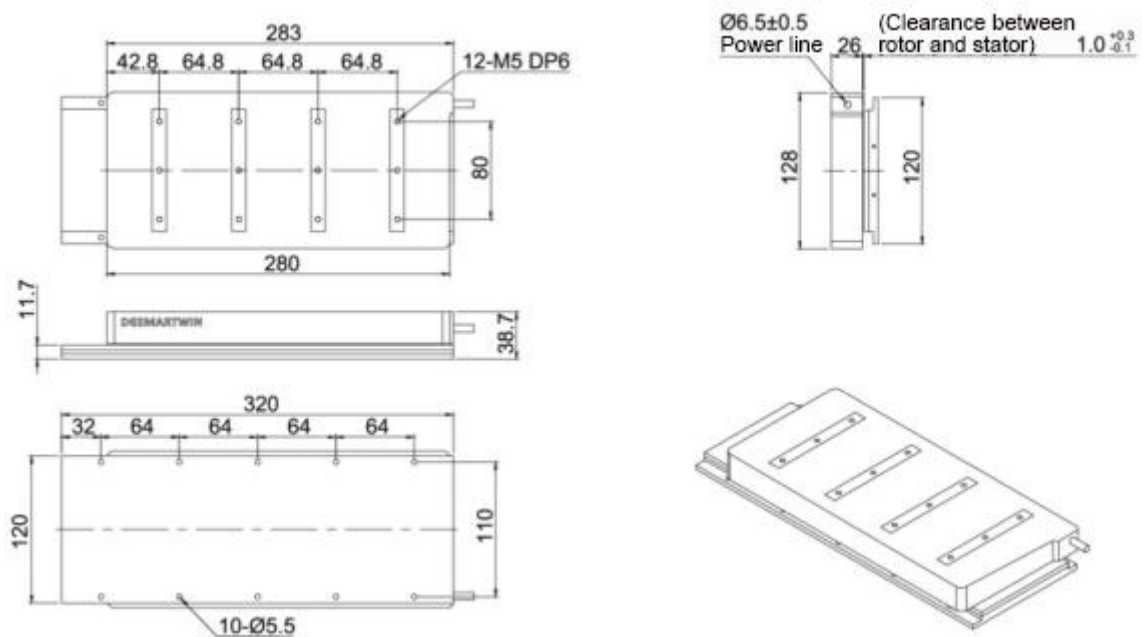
Dimensional drawing of WZCR-AZ120C4-□ and WZCR-AZ120C4S-□ motor
